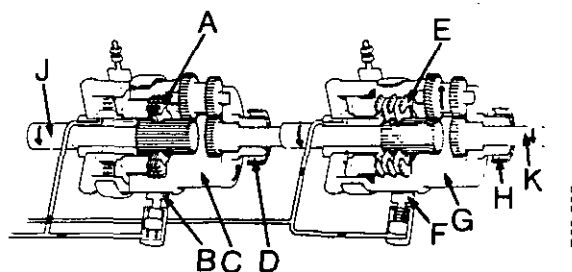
PLANETARY UNITS IN SECOND GEAR
